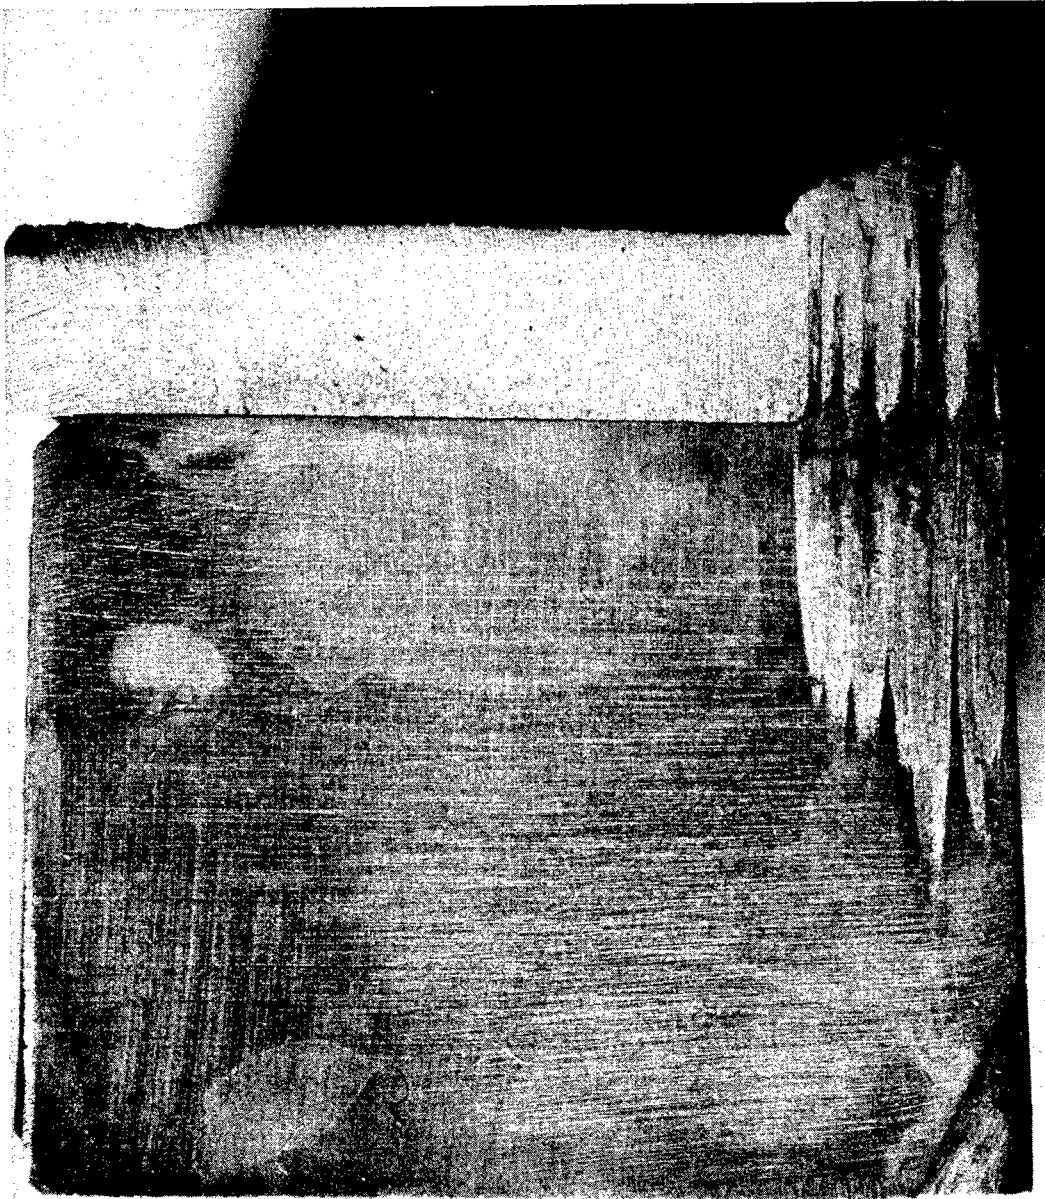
Transverse Section Through Adjacent Welds.
